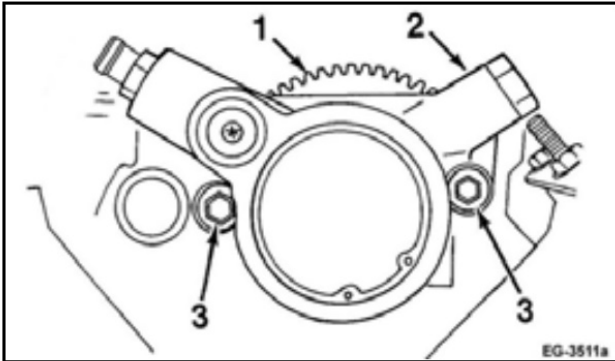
Removing High-pressure Oil Pump Mounting Bolts
